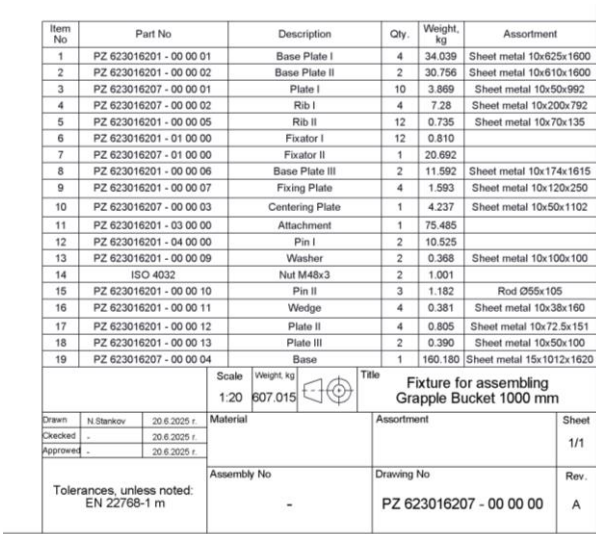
Drawing of the fixture for assembling a 1000 mm grapple bucket.
